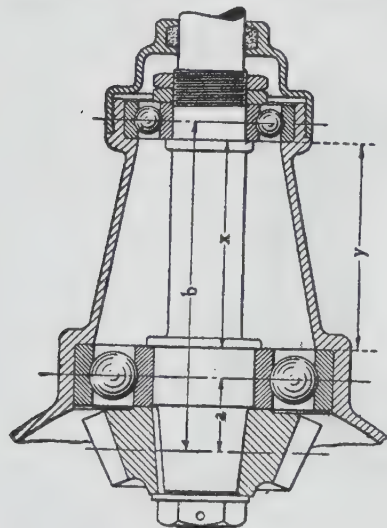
PINION SHAFT MOUNTING WITHOUT THRUST BEARING.
